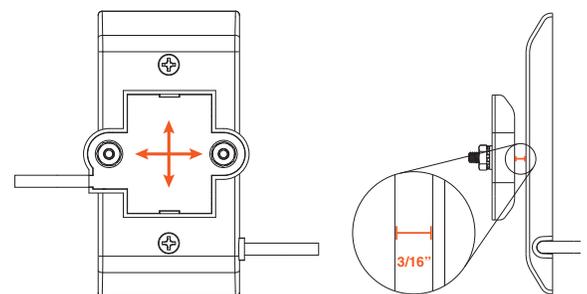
Receiver and Transmitter Charging Pad Alignment
